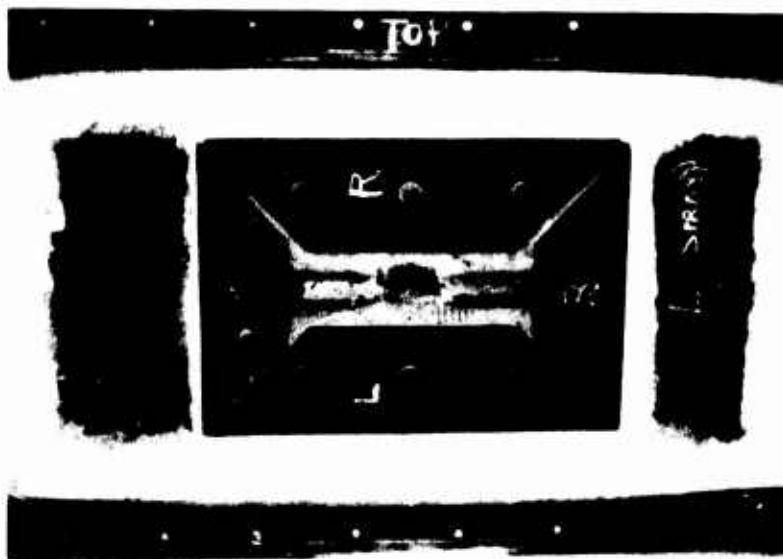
Backing-strip plate with 3.54-in. (8.99 cm) long slot.
